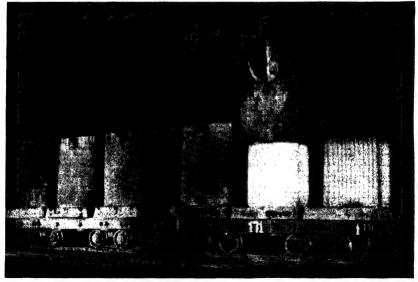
Molds being stripped from solidified steel ingots. (Courtesy of the Bethlehem Steel Co.)
